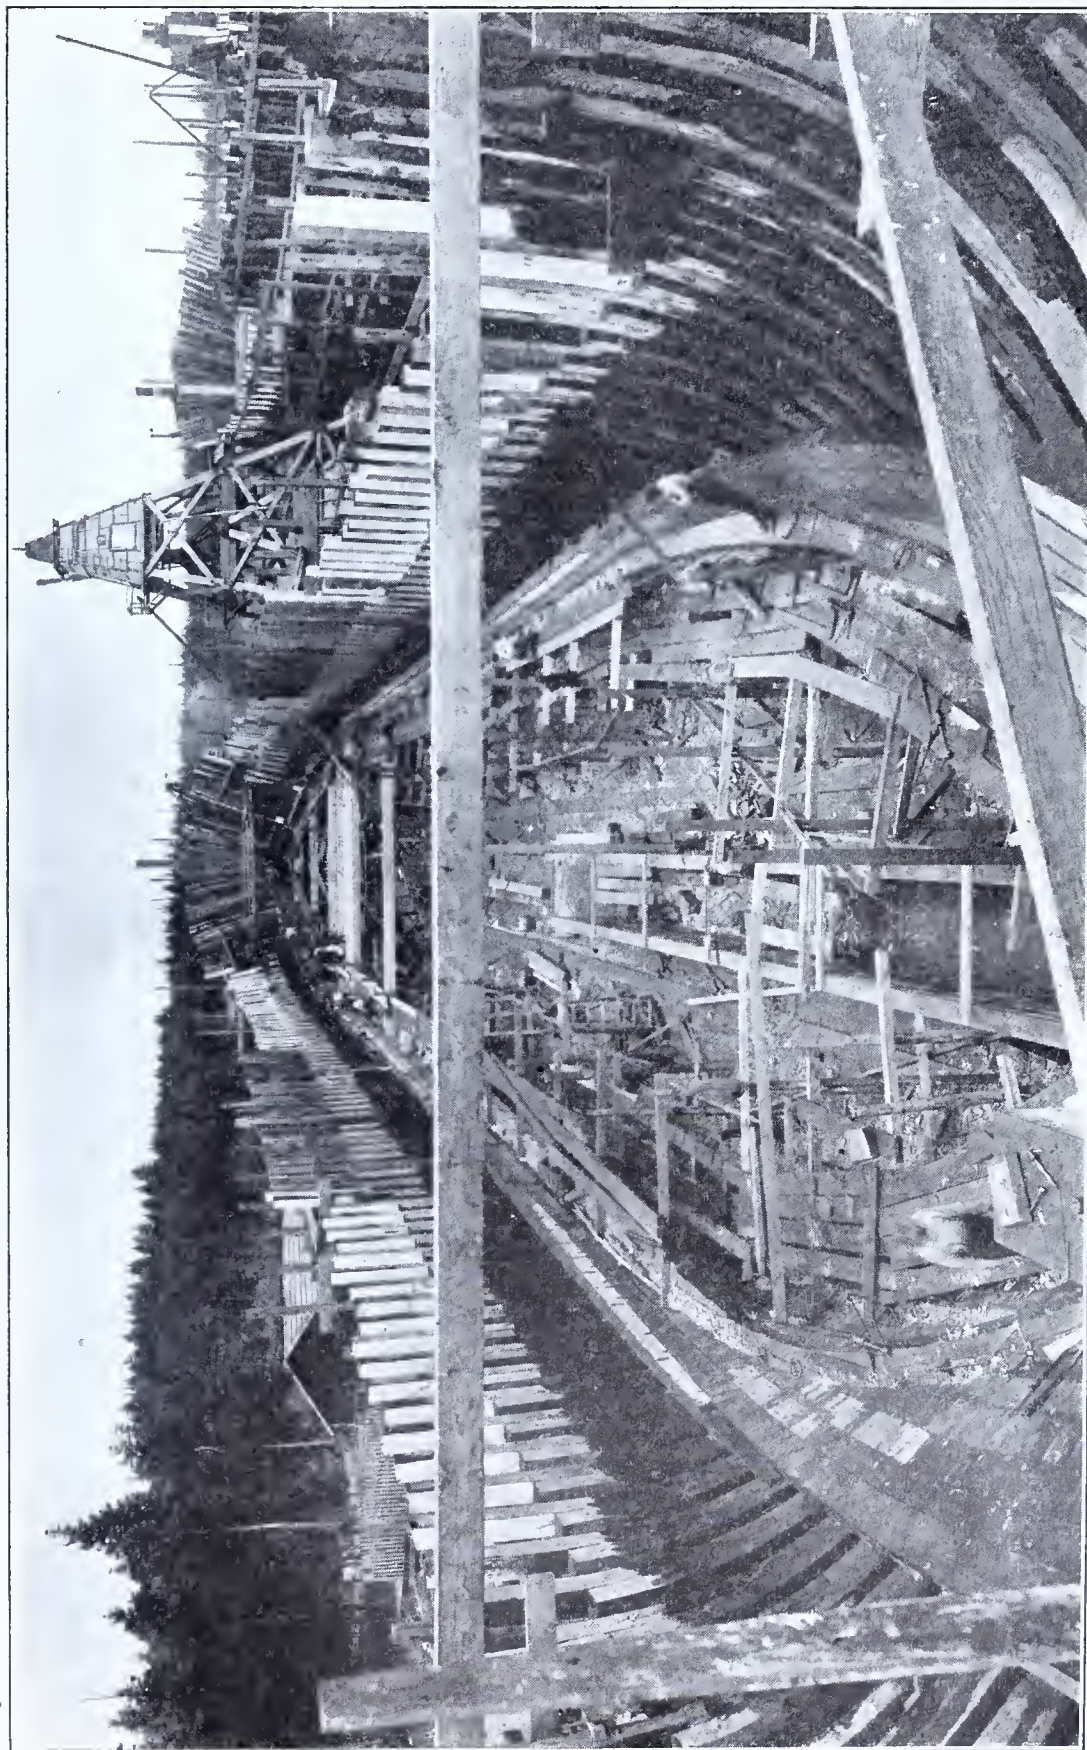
Interior of hull looking forward showing floor ceiling, bilge ceiling, sides of shaft tunnel, and forward lower hold beams.
